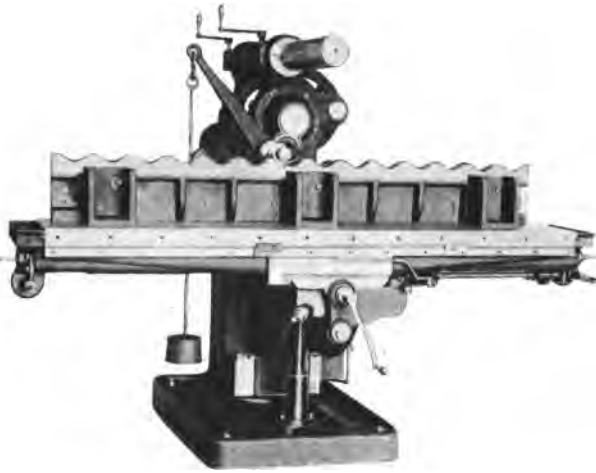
Irregular slots may be cut into plates or upon the edges of plates, and made to work in unison with a roll. Such an arrangement may be classed as a cam
